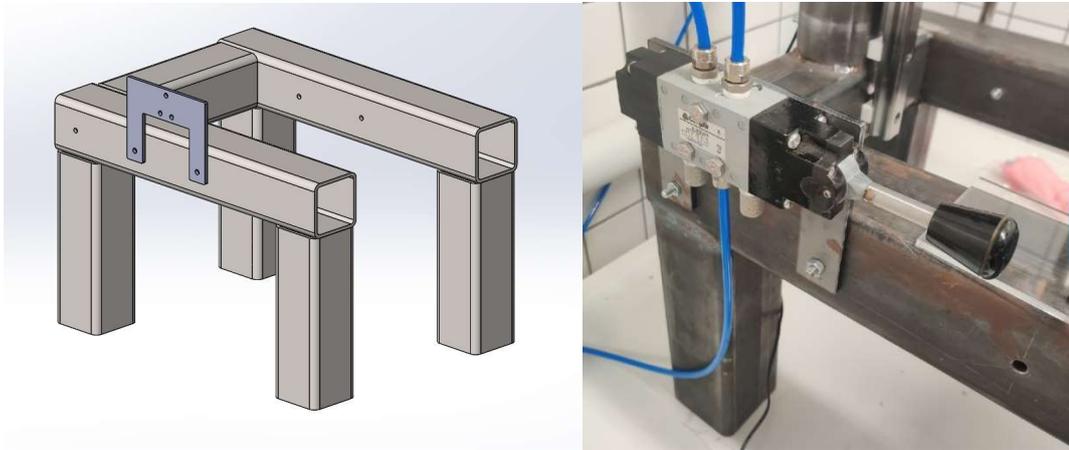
Directional control valve used to operate the pneumatic cylinder.
